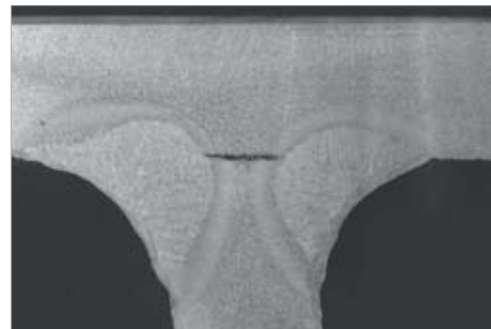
Double-sided single layer fillet weld in PG/3F-down position welded with OK Tubrod 14.12 – 1.2mm. I=210A, U=24V, Travel speed=60 cm/min. Wall thickness: 6mm. Throat thickness:  $a=3$ mm. Shielding gas: CO<sub>2</sub>.
